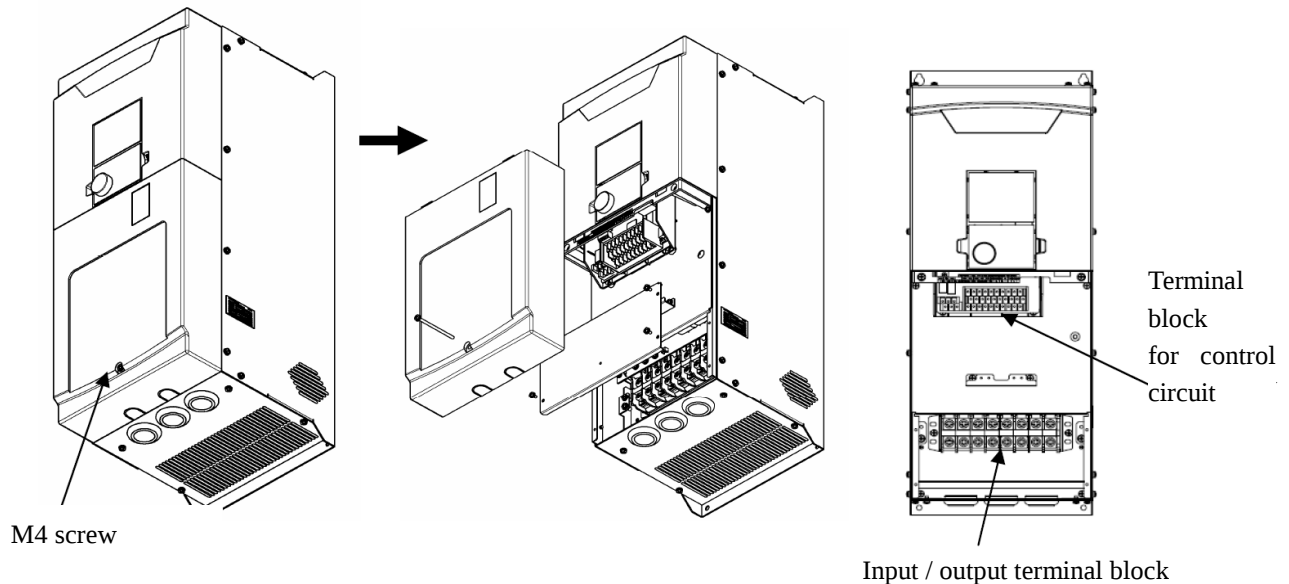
Removal of front cover (lower) and internal sealing plate (iron)
